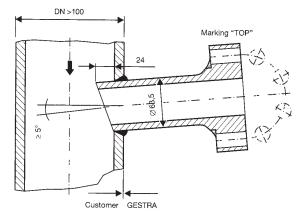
Welding of standpipe to pipes (tee pieces) DN > 100
